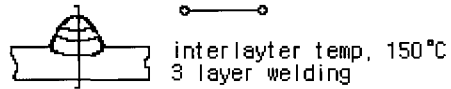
Schematic view of 3 pass welded cast Iron
